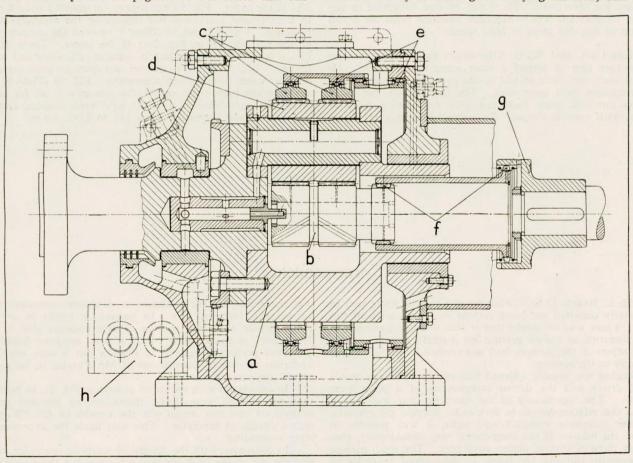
Typical double helical Stoeckicht epicyclic gear
